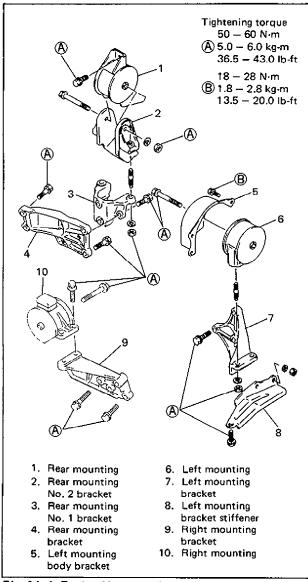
A-4 Engine Mounting (For 2WD M/T Model)
